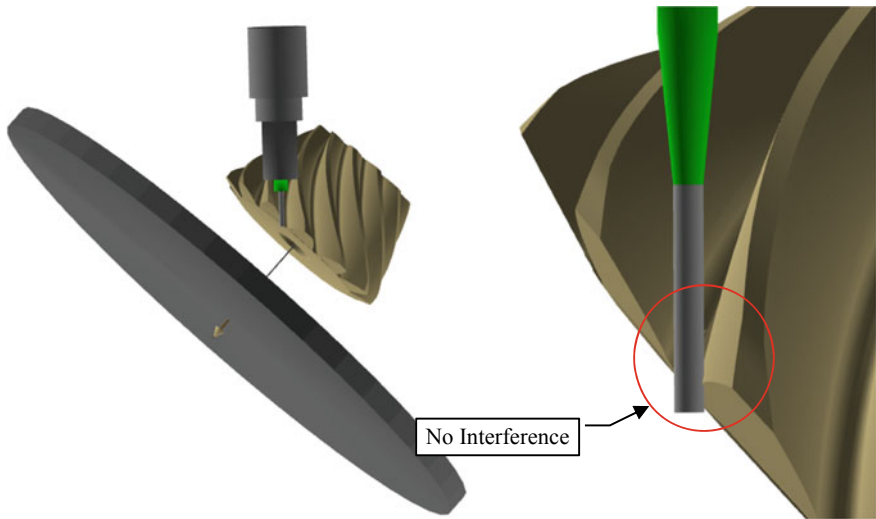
Heel chamfering with EM—spiral bevel pinion
